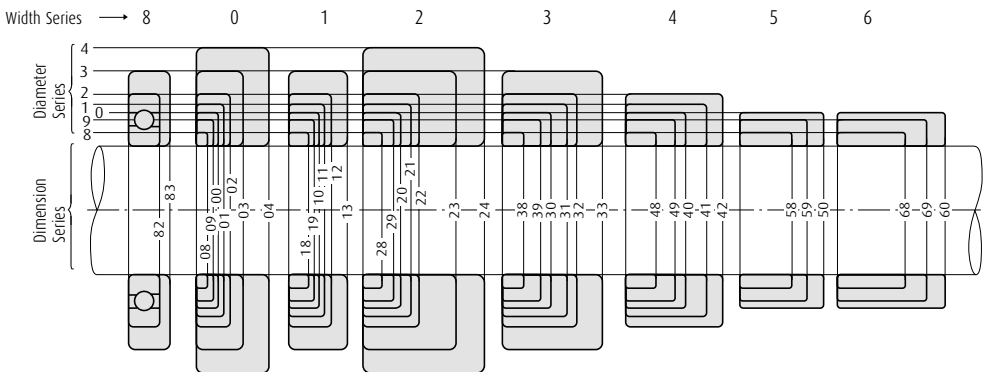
Comparison of Cross Sections of Radial Bearings (except Tapered Roller Bearings) for various Dimensional Series
